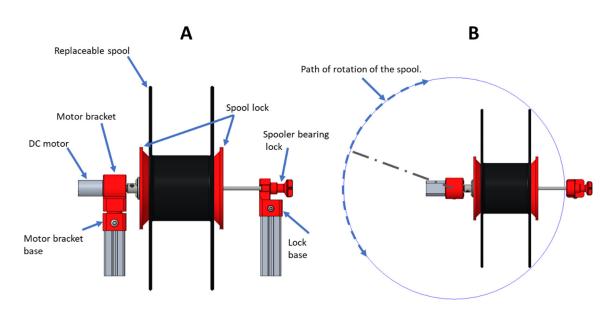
(A) Sub-assembly of the spooler system (front view). (B) Top view with a blue circle showing the clearance for the spool when turning around the motor axis.
